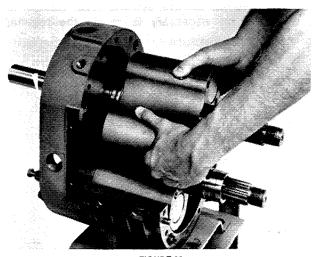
ASSEMBLING DRIVE ROTOR TO DRIVE END PLATE
